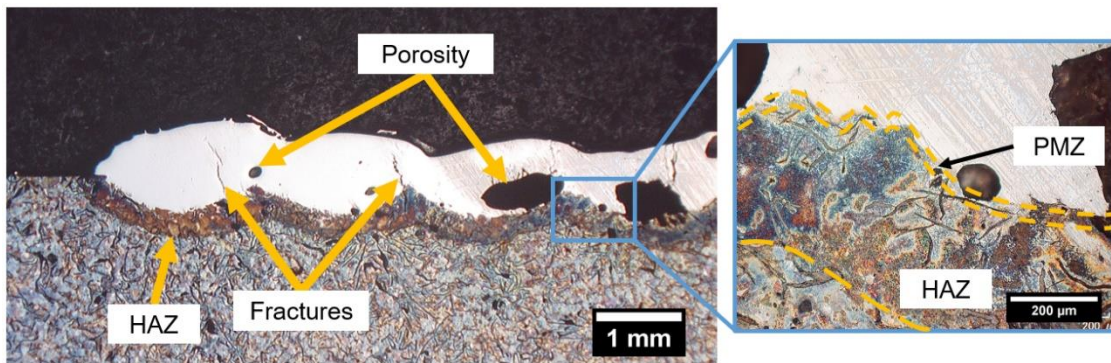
A stainless steel DED coating deposited on gray cast iron.
